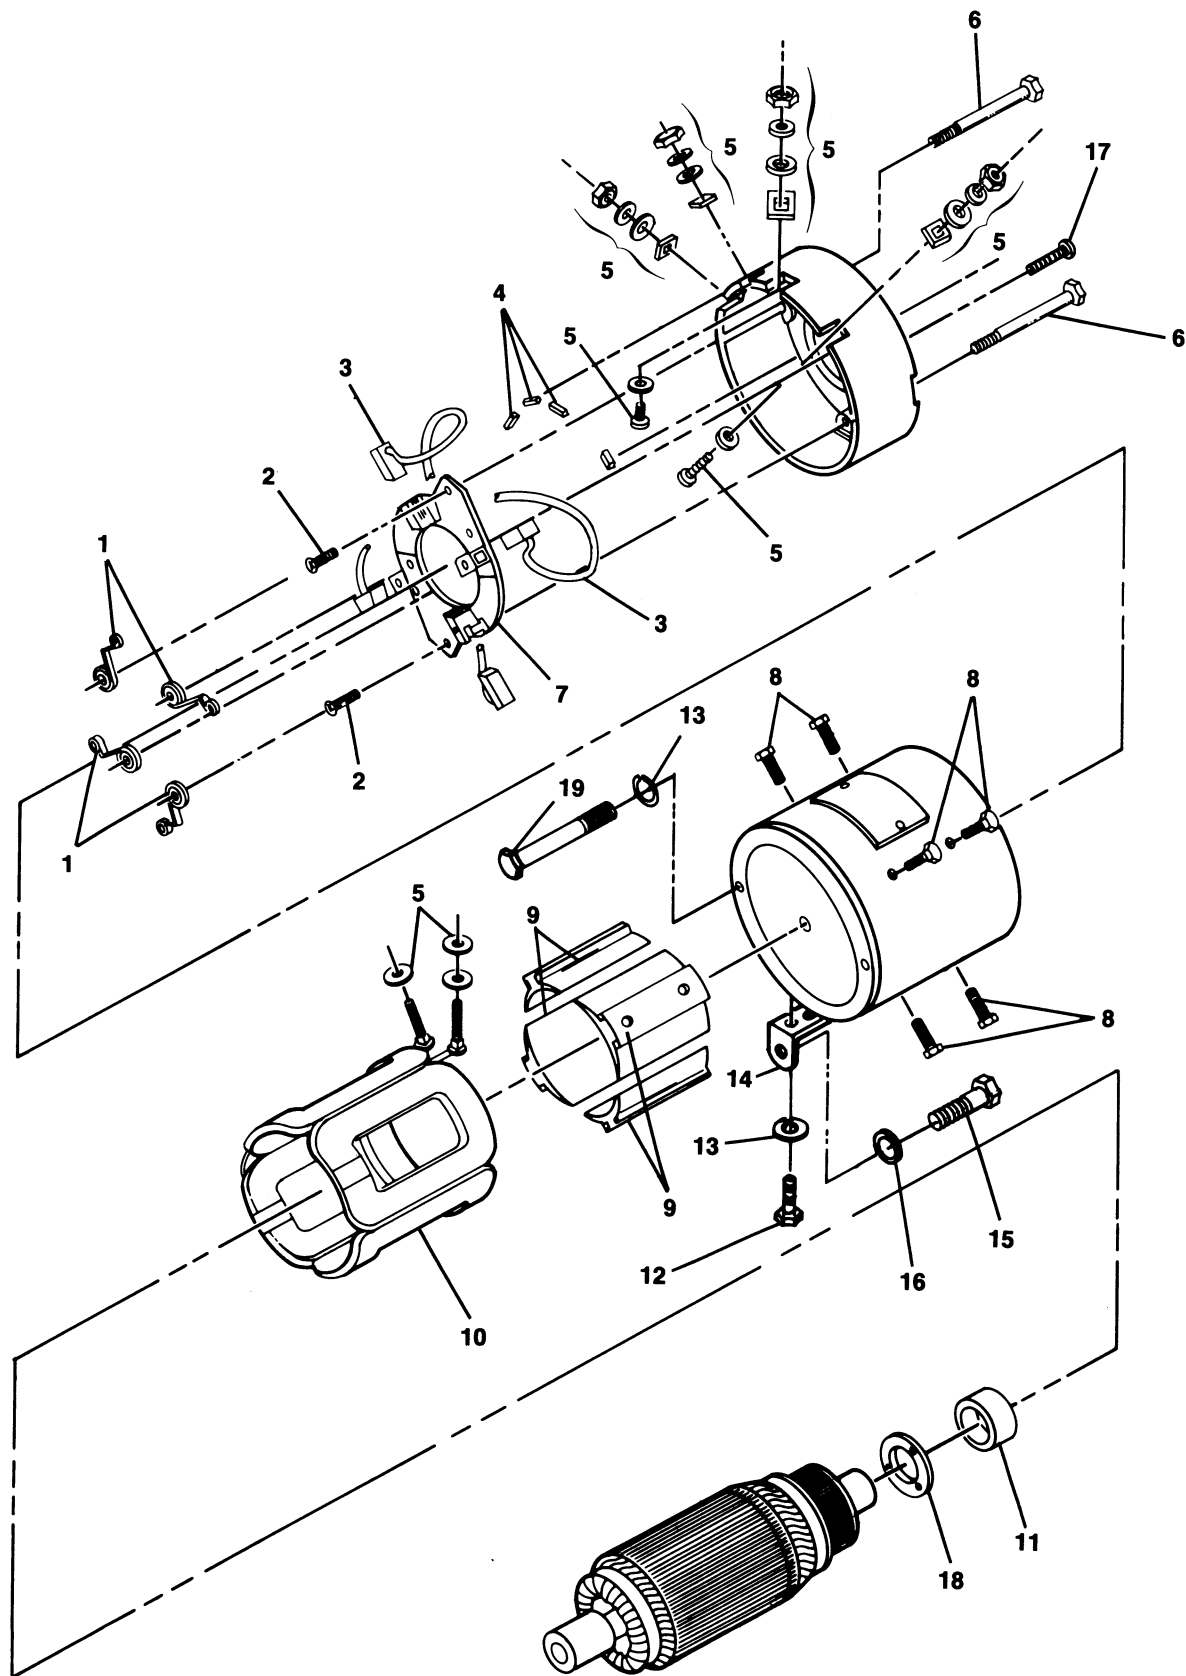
MOTOR ASSEMBLY. SEE LIST 2-2.
